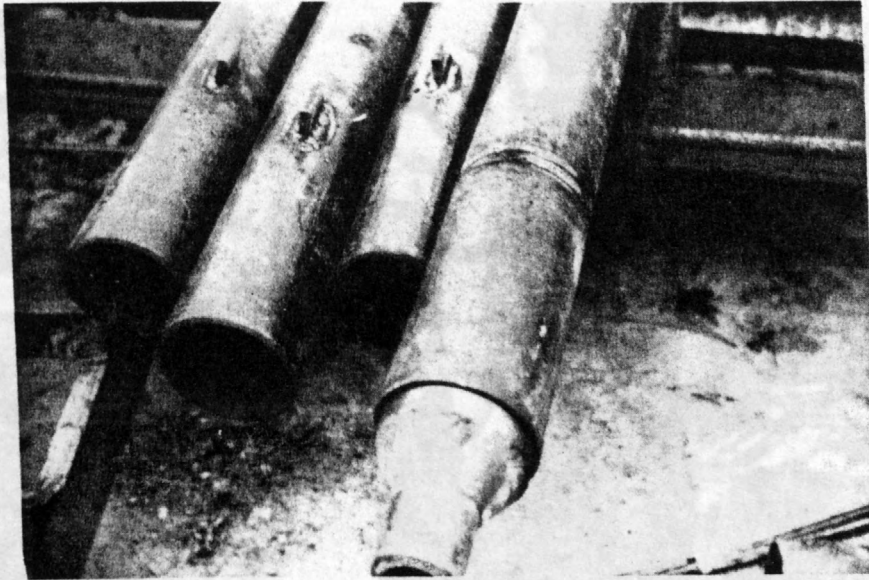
Drill-rod sub screwed in coupling butt-welded to joint of 5 1/2-in (140-mm) steel casing.
